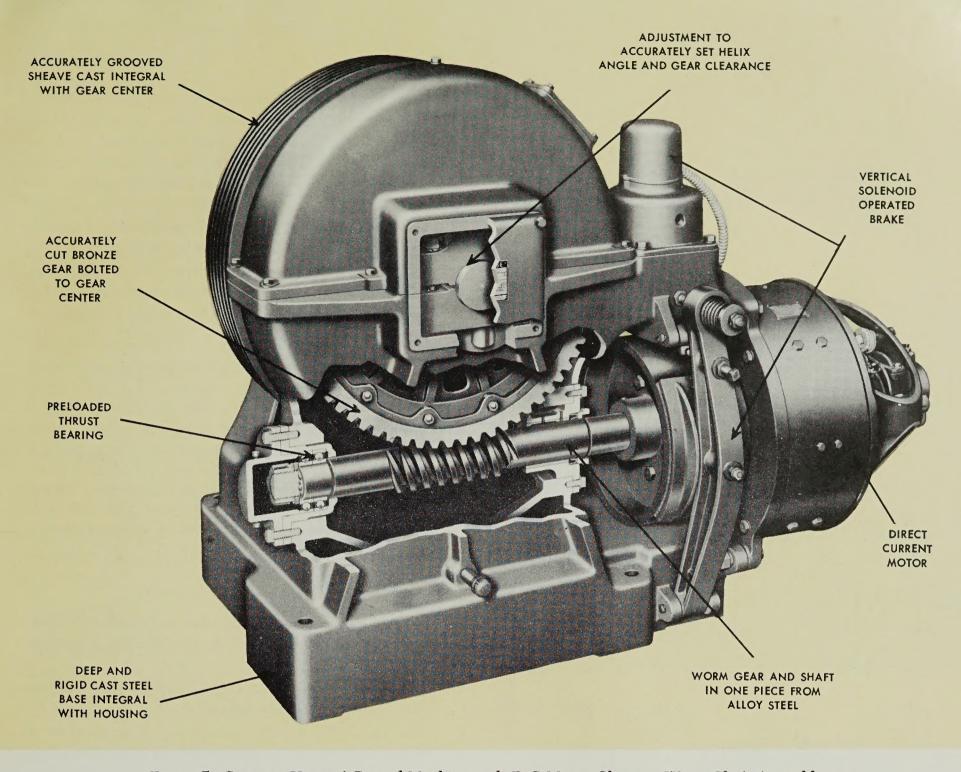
Cutaway View of Geared Machine with D-C Motor, Showing Worm Shaft Assembly
